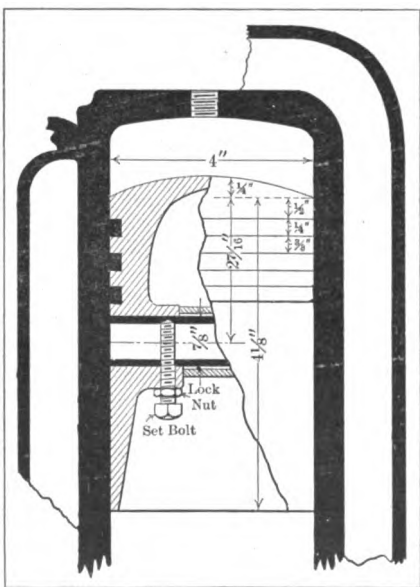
Showing a section through a piston for a motor of 4 inches bore
